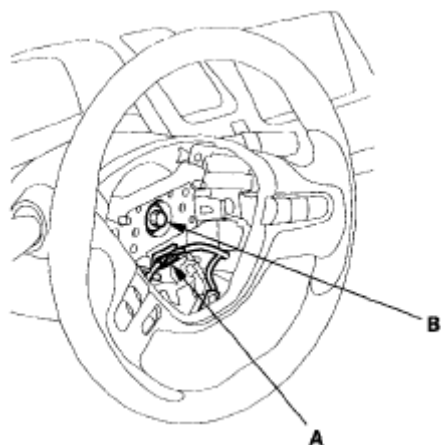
Identifying Cable Reel Subharness Connector And Steering Wheel Bolt
